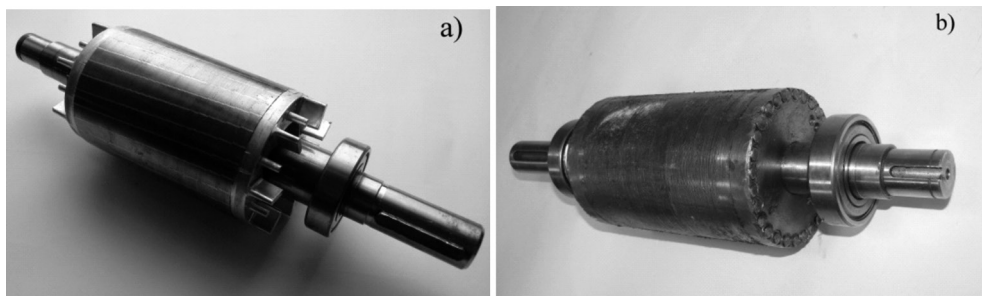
Rotor of a) squirrel-cage motor and b) LSPMSM with a squirrel-cage manufactured from copper
